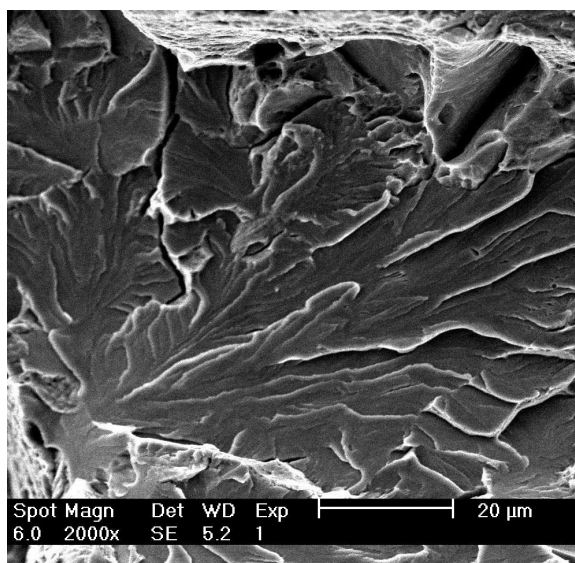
(d) - FF (cleavage) observed within a LIST fracture surface
